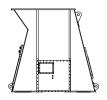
Dispatch pattern, engine with turbocharger on exhaust side (4 59 123)
